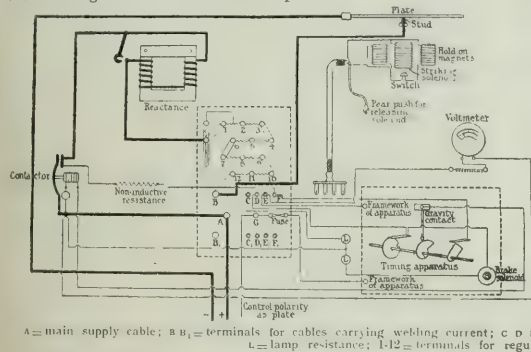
CONNECTIONS OF PORTABLE WELDER.
